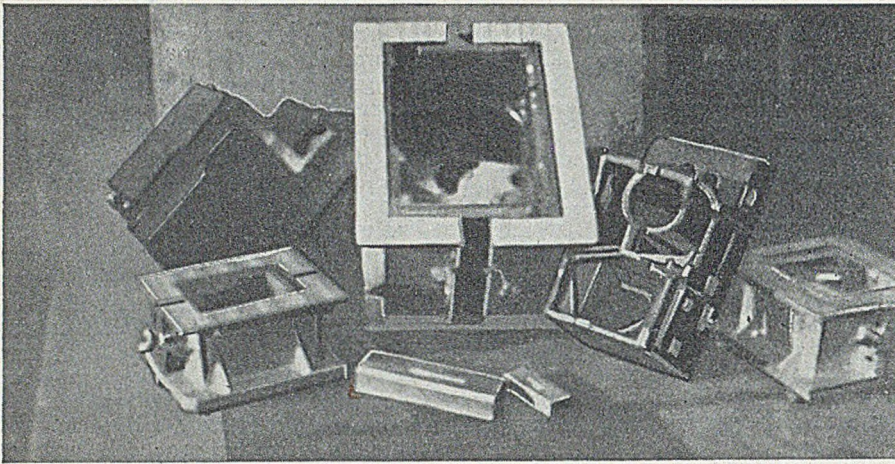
(top, left), *Cinematograph Sound-head Pattern*; also shown are a *Finished Casting* (right, centre) and several *Metal Core-boxes*.
